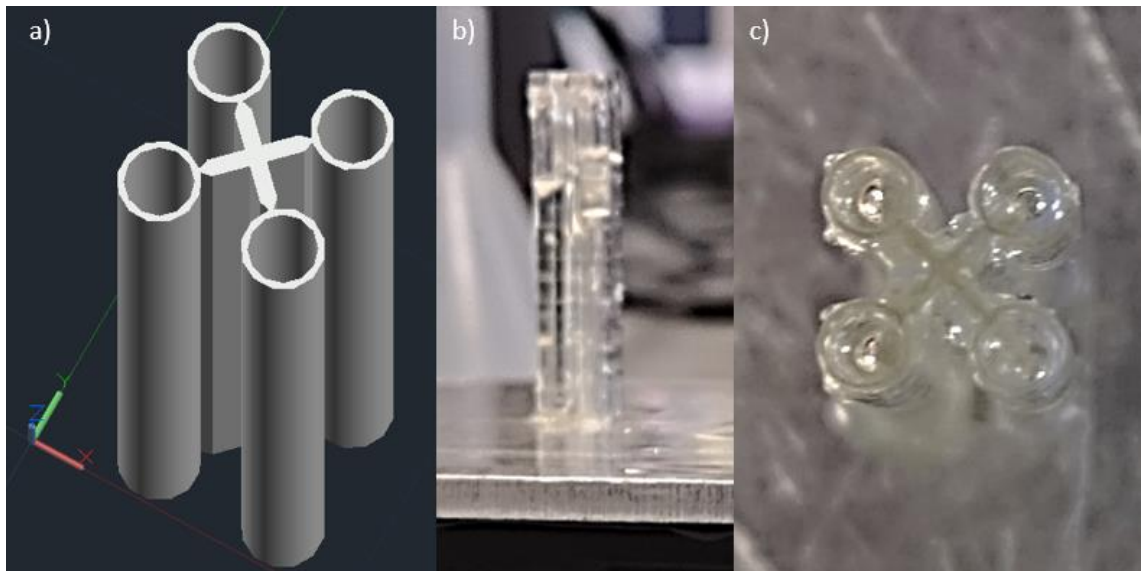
a) CAD design of the tubes and support structure. b) side view and c) top view of the printed model. Again resin is held within the internal space through capillary forces, and is washed out prior to post-curing.
